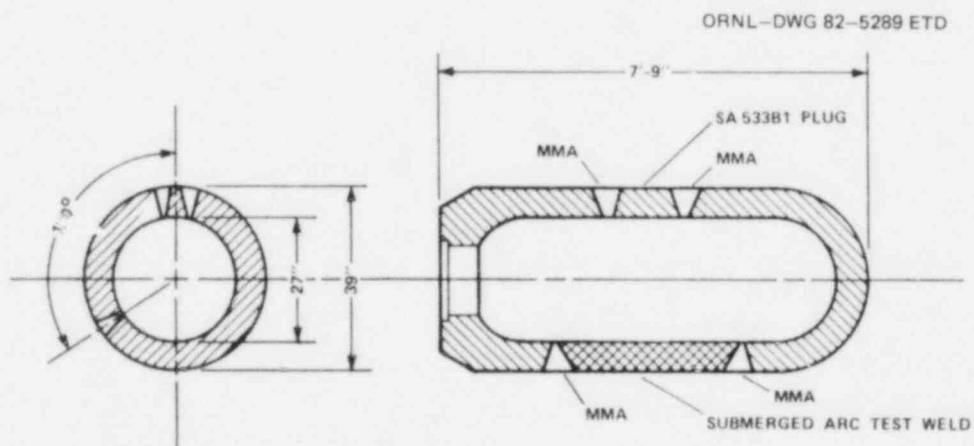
Vessel Repair and Long Seam Test Weld
